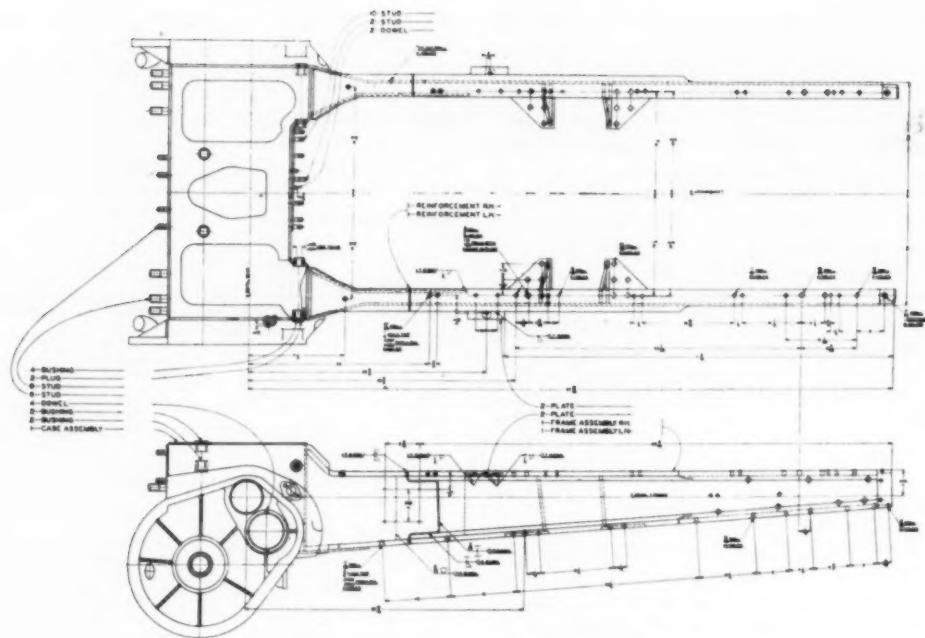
FRAME AND STEERING CLUTCH-CASE ASSEMBLY
